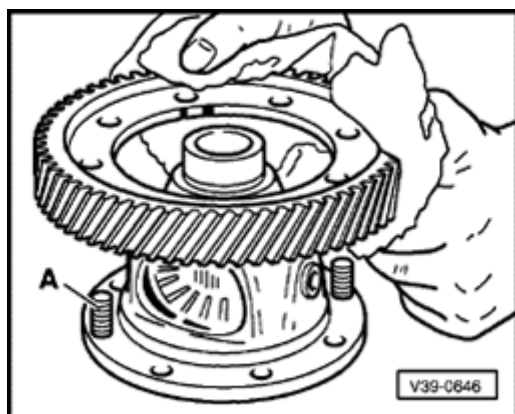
Heating final drive gear to approx. 100 °C and installing
